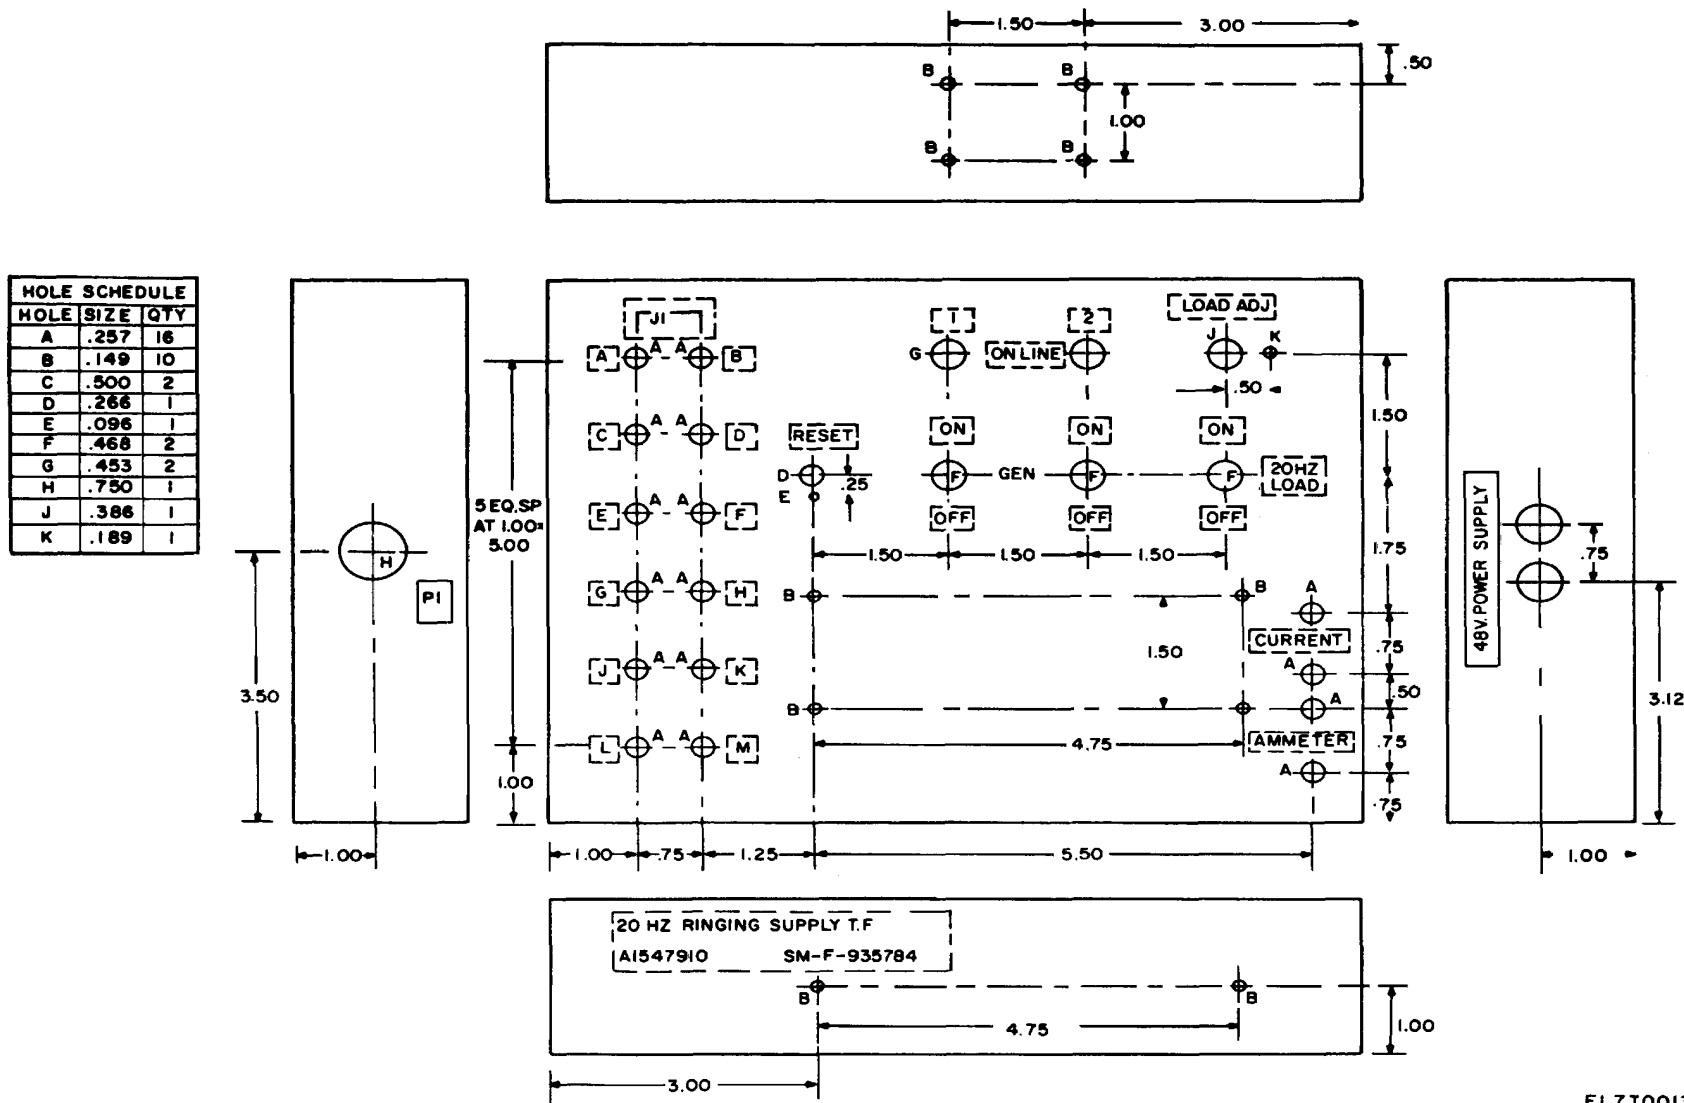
20-Hz Ringing Supply Test Fixture, Chassis Layout and Marking Diagram.
